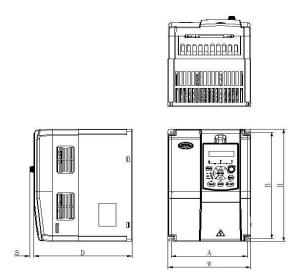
Schematic of 0.4kW to 11kW external dimensions and mounting dimensions
